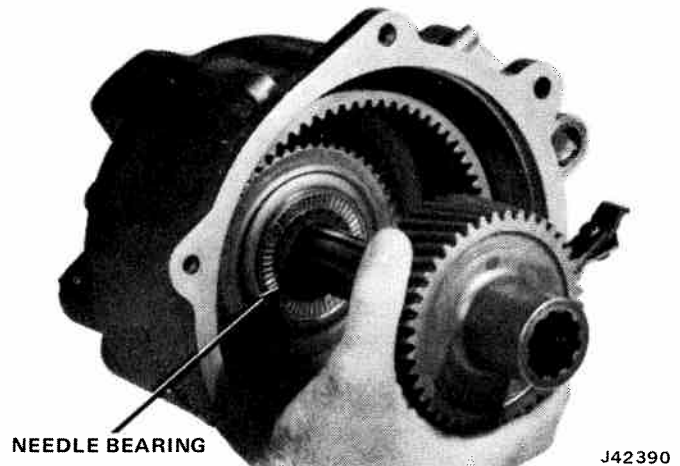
Installing Mainshaft and Sun Gear Assembly
